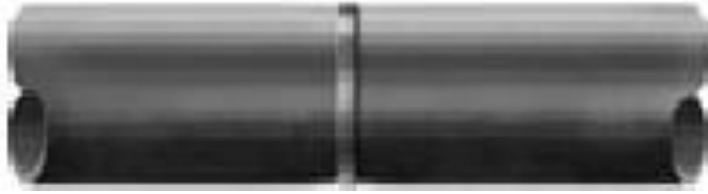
The 90 mm diameter pipes were butt welded.
